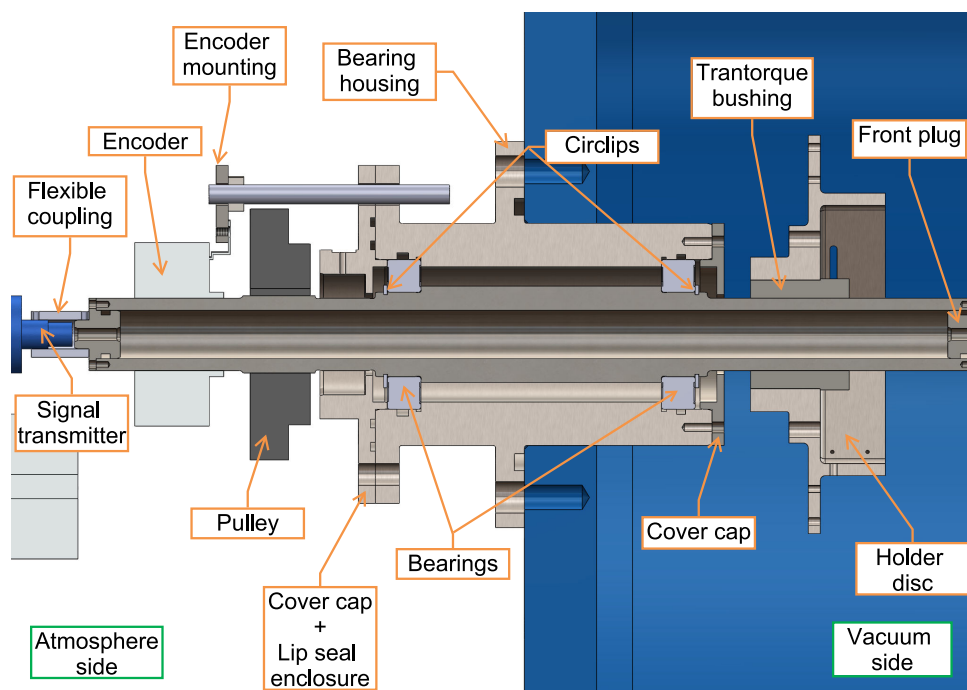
Drive system: CAD section view of the bearing housing-shaft assembly
